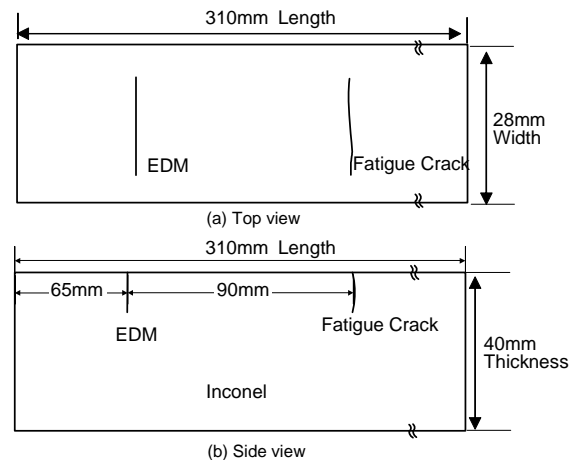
Configuration of alloy 82 weld specimen.
